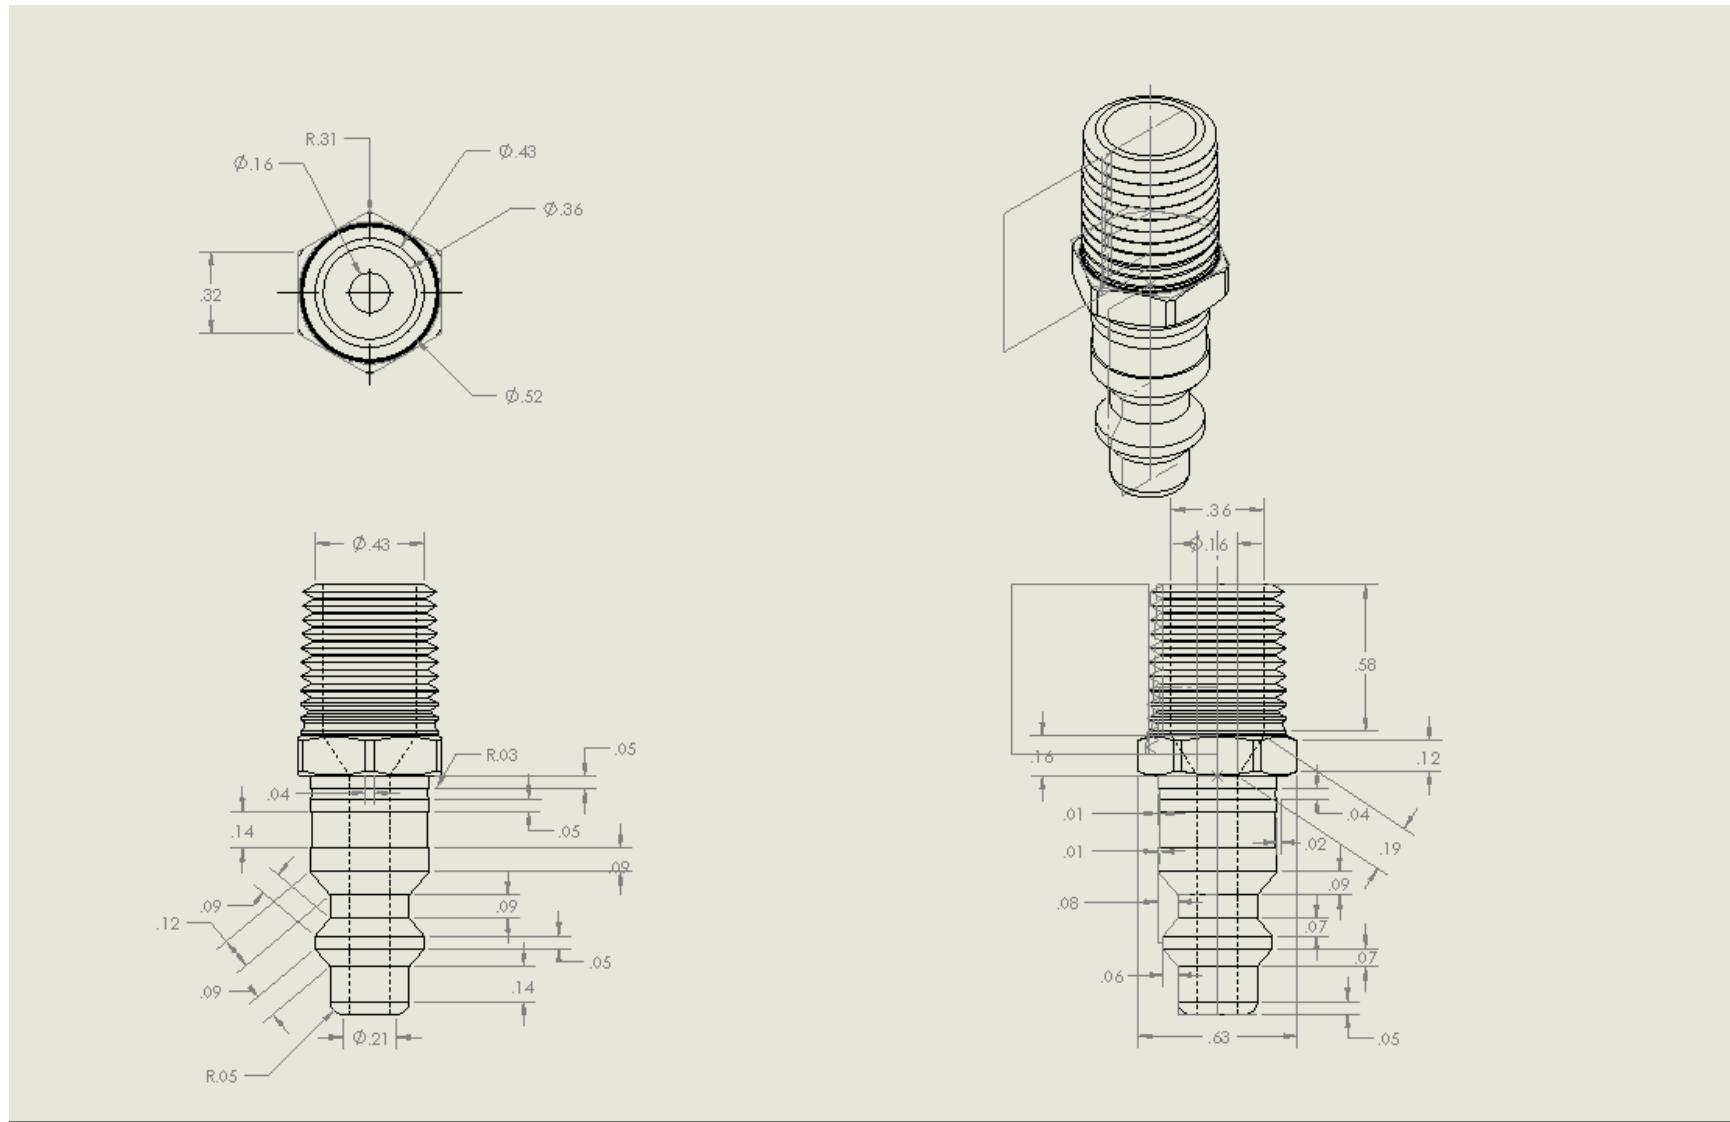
Part 1024 (Industrial-Shape Hose Coupling Size 1/4, Zinc-Plated Steel Ply, 1/4 NPTF Male End) Part Drawing
